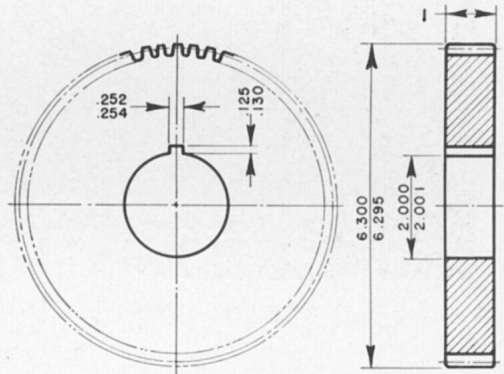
Dimensions of a 61-tooth 10 pitch spur gear.
